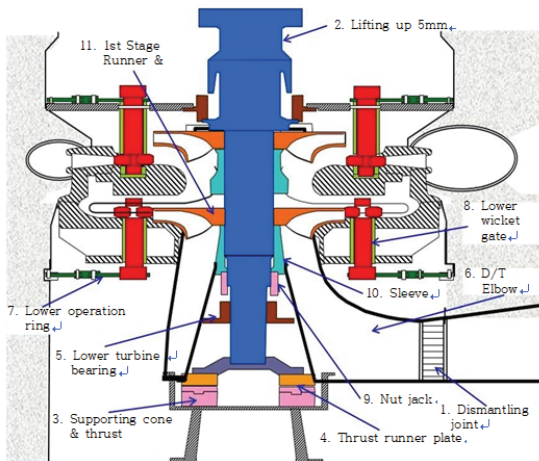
Assembly sectional drawing of vertical shaft, double regulated stages Francis pump turbine
